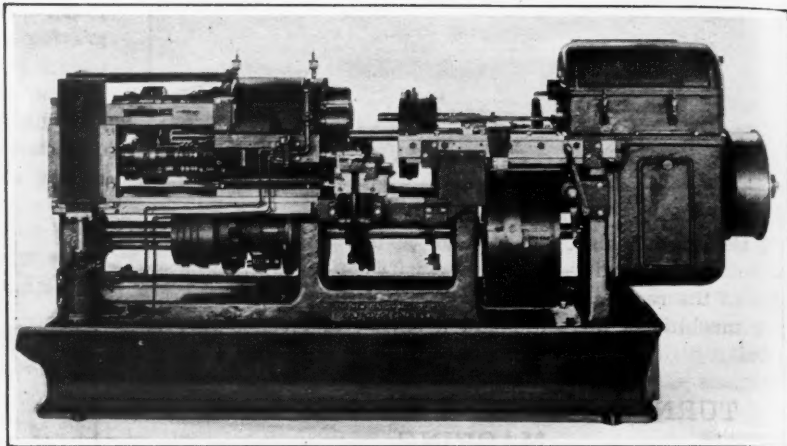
Front View of New Britain Multiple-spindle Automatic Chucking Machine
